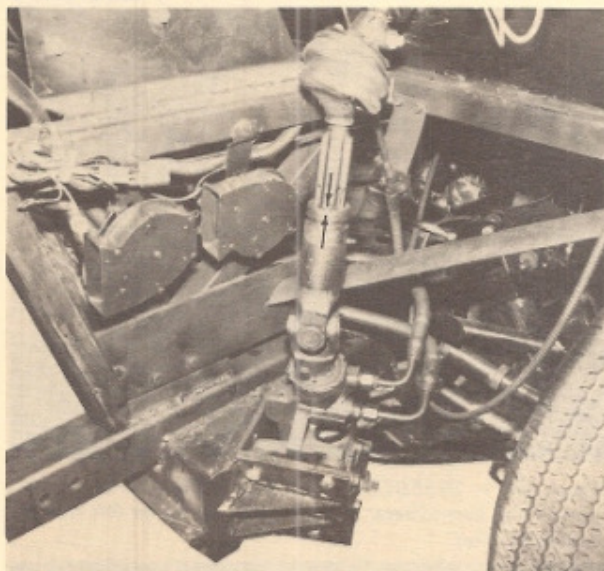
Sub-Frame Mounting Positions: There are three mounting positions located on both right and left frame rails. The first position is located forward near the bumper mount at the upright of the upper structure. Remove two (2) 9/16" diameter nuts from both sides, but do not remove bolts at this time. Be sure when you begin this final phase of removing the mounting bolts that you have a way of bracing the sub-frame.
